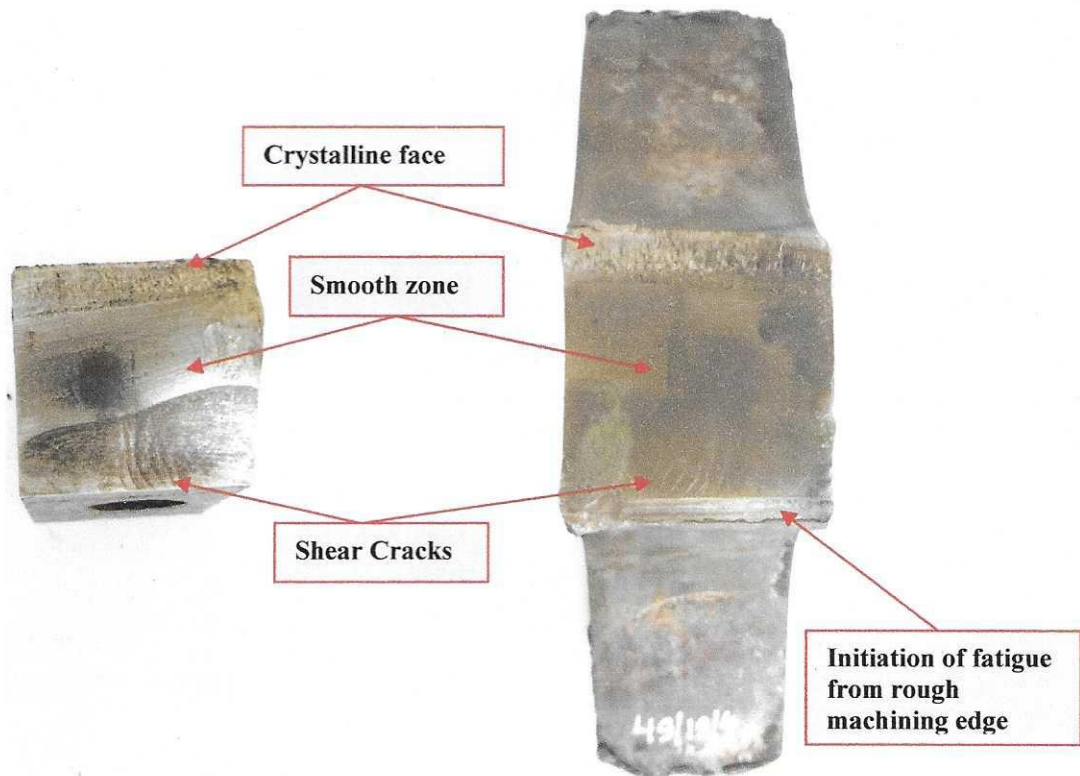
Photograph showing fractured initiation in fatigue manner from rough machining edge of inner RH side traction motor-3 support lug piece.
